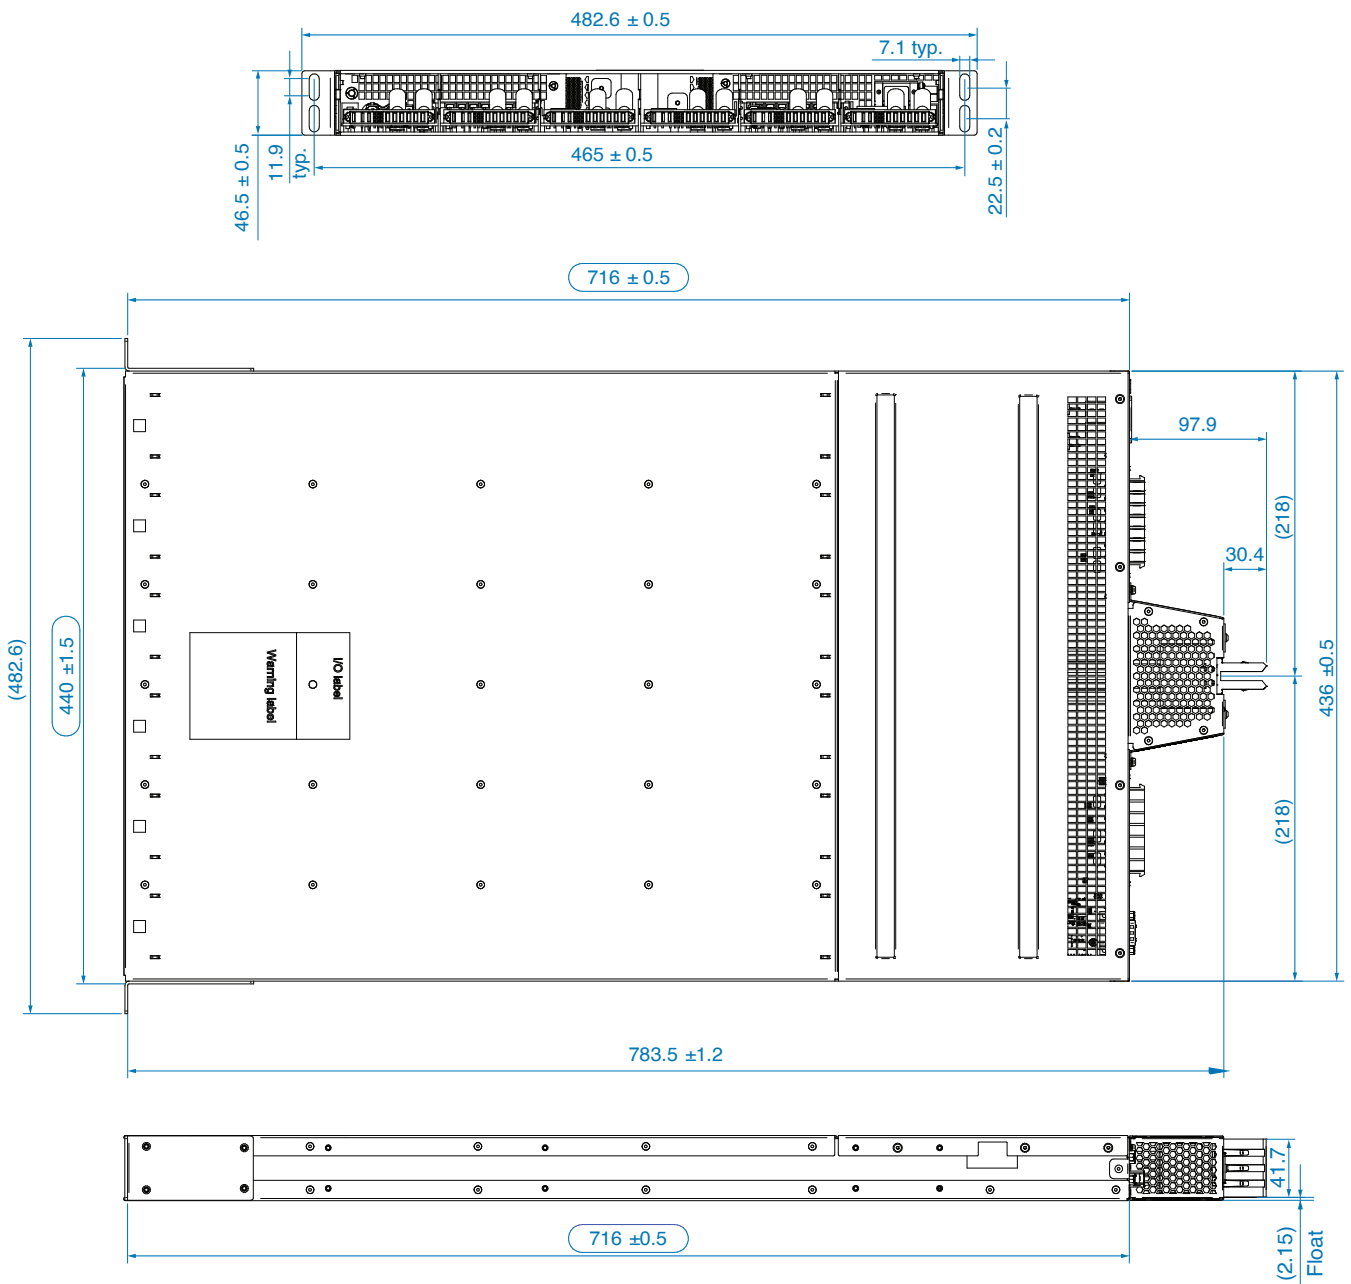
SPSTET4V3-02 Mechanical Drawing with Dimensions (Front, Top, Side View)
